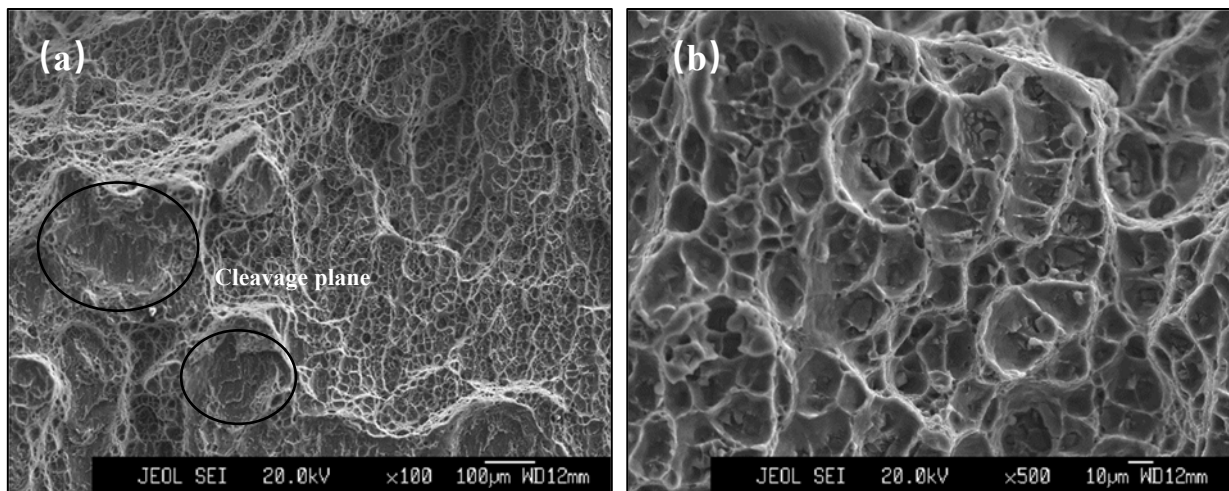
9 Fracture morphologies of tensile specimens of the AA5083 linear friction weld.
